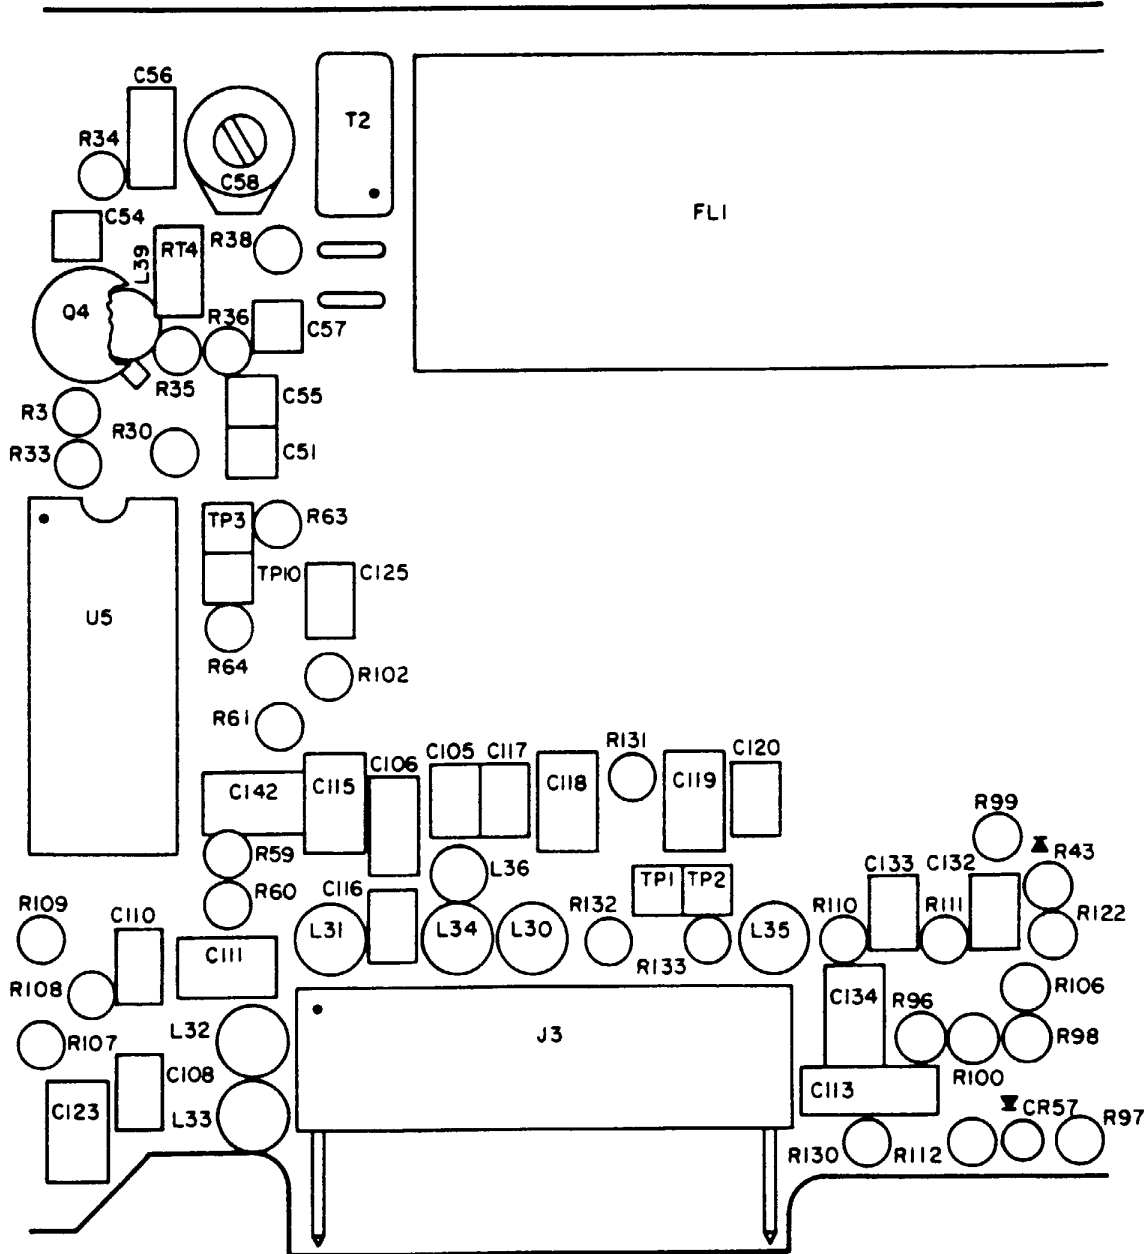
Main Receiver Assembly A1A1A4 Component and Test Point Location Diagram (Sheet 1 of 5)
